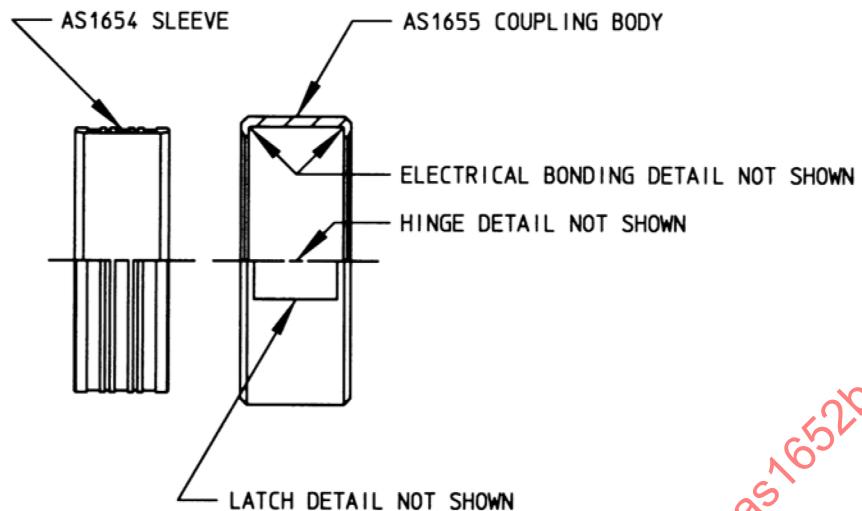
COUPLING ASSEMBLY, EXPLODED VIEW
